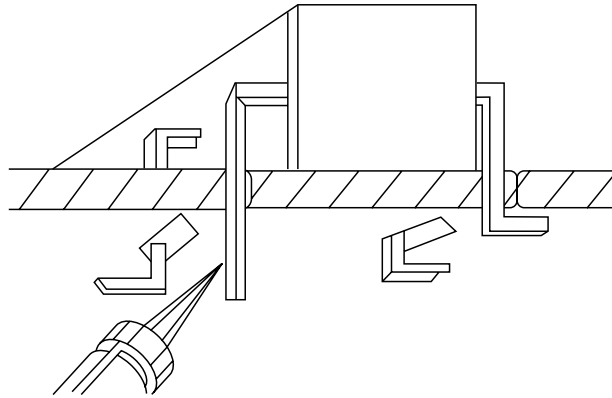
USE SOLDERING IRON TO PRY LEADS
